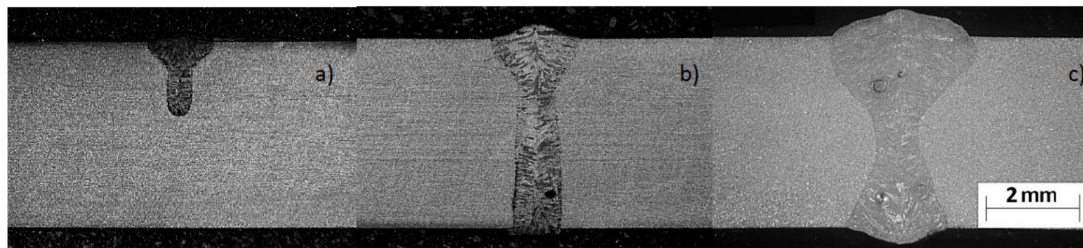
Examples of macrographs performed with disc laser welding (a) with partial penetration (bell shape), and (b) and (c) with full penetration (with a narrow and wide root known as the hourglass shape).
